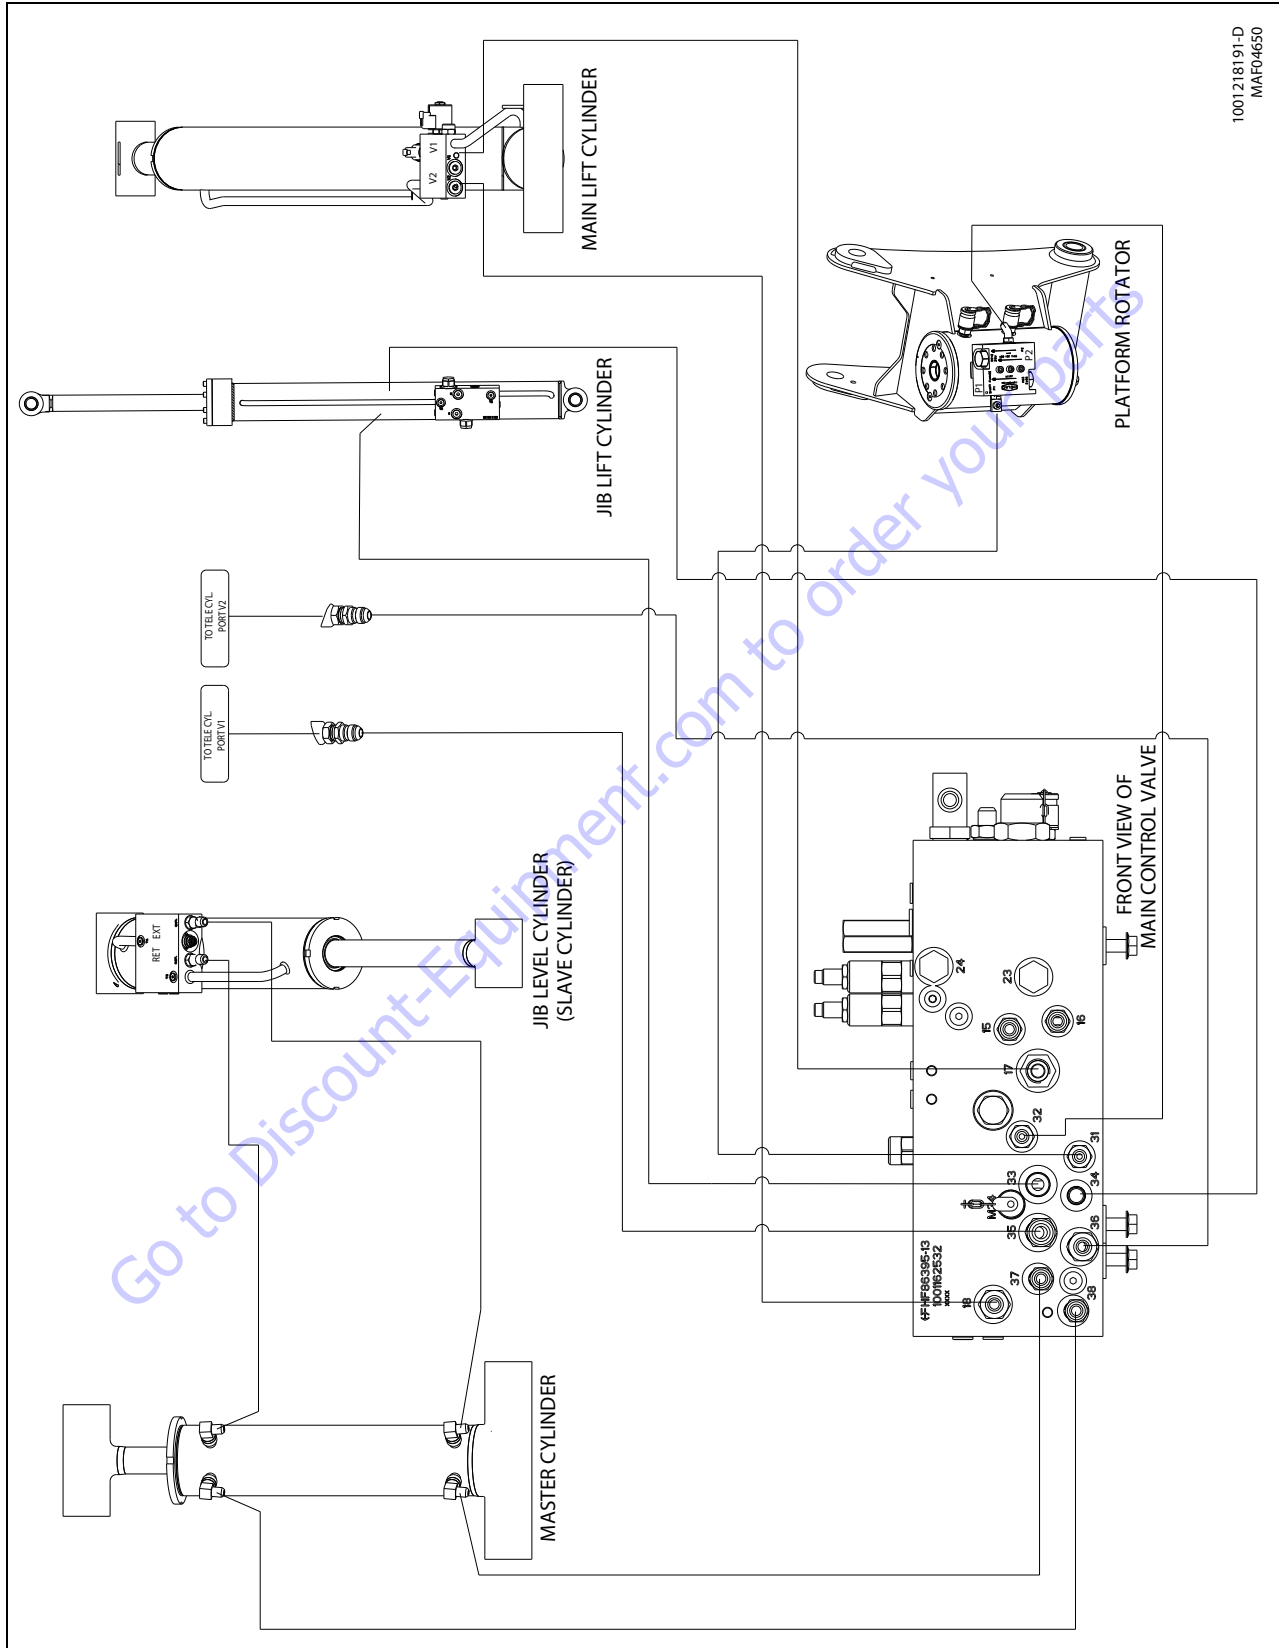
Hydraulic System Installation (4605JC) - Sheet 4 of 15
